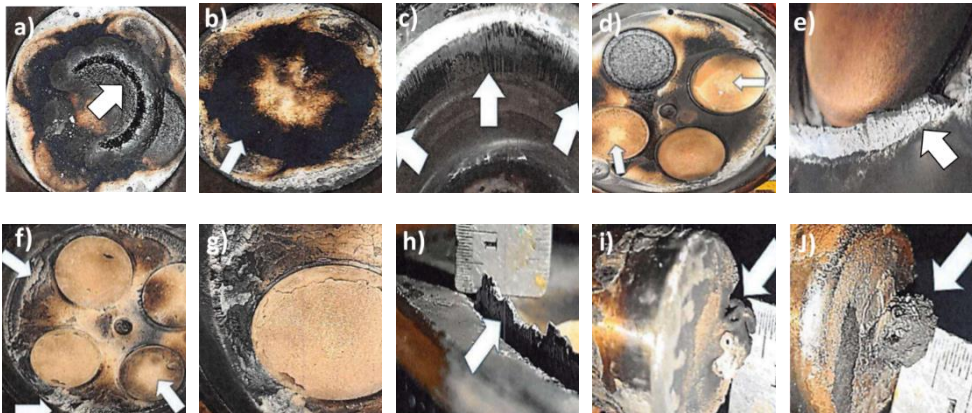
Photograph of engine parts after running test. a) Piston no.5 b) Piston no.8 c) Cylinder liner wall no.5 d) Cylinder head no.5 e) Cylinder head deposits no.5 f) Cylinder head no.8 g) Cylinder head deposits no.8 h) Enlarge view of (g) i) Fuel injector no.5 j) Fuel injector no.8.
